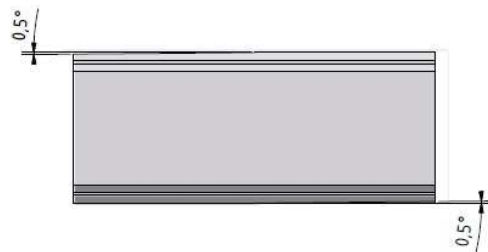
Picture of one clamping jaw version with 0.5° chamfer
